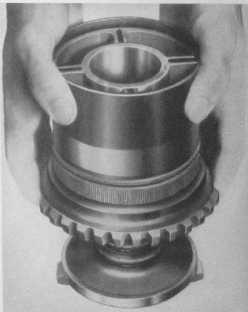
Installing Barrel and Blade Vane Assembly Over Center Post
